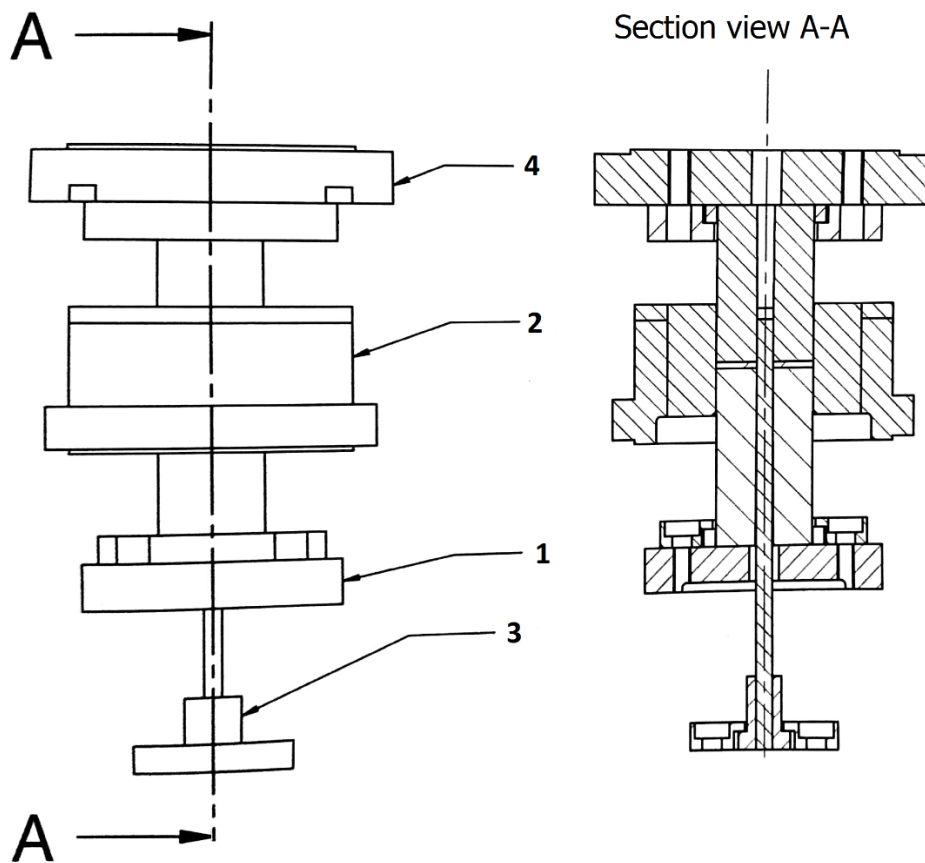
Technical drawing of the pressing tool consisting of the upper (1) and lower punch (4), the movable needle (3), as well as the matrix (2) with section view A-A [5]
